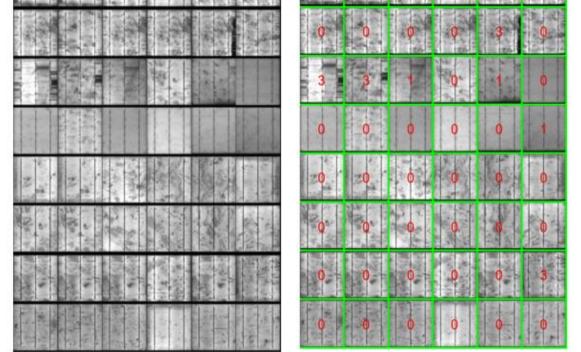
EL image before and after automated crack processing, with 0 indicating a healthy cell and 1-5 representing specific crack types (line cracks, soldering anomalies, complex cracks, Edge ribbon cracks, and PID).
